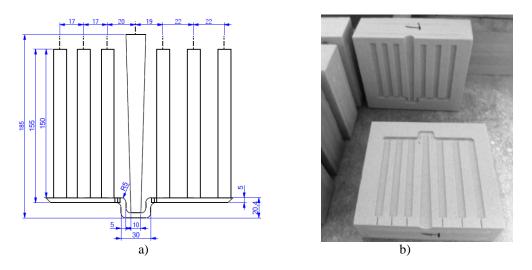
a) Dimension of the mould b) Sand mould after shake out
